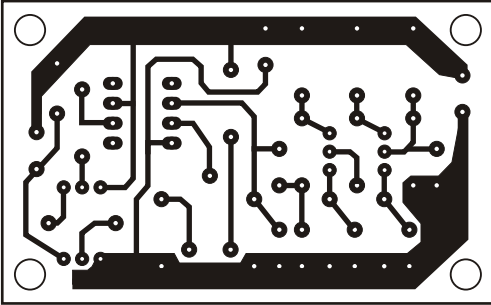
Actual - size, solder-side PCB layout of Receiver.
